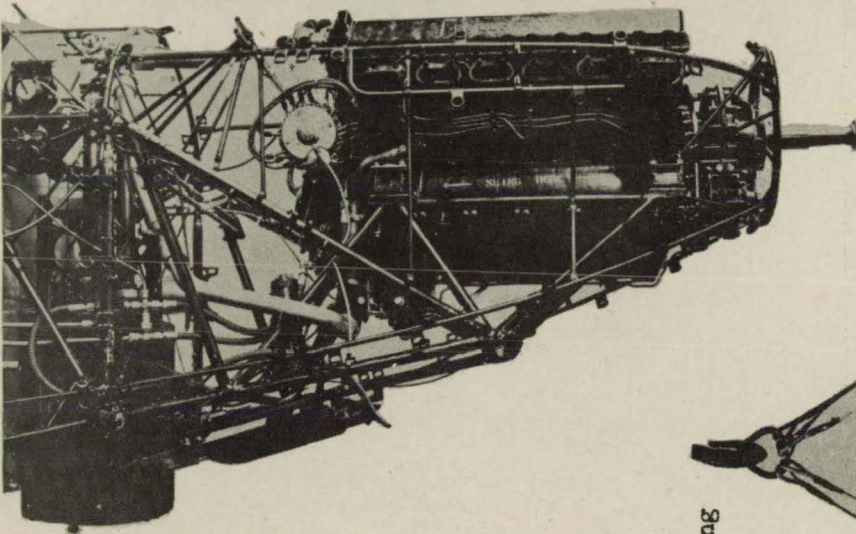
The welded engine mounting, oil cooler, retractable radiator and other installation features.
